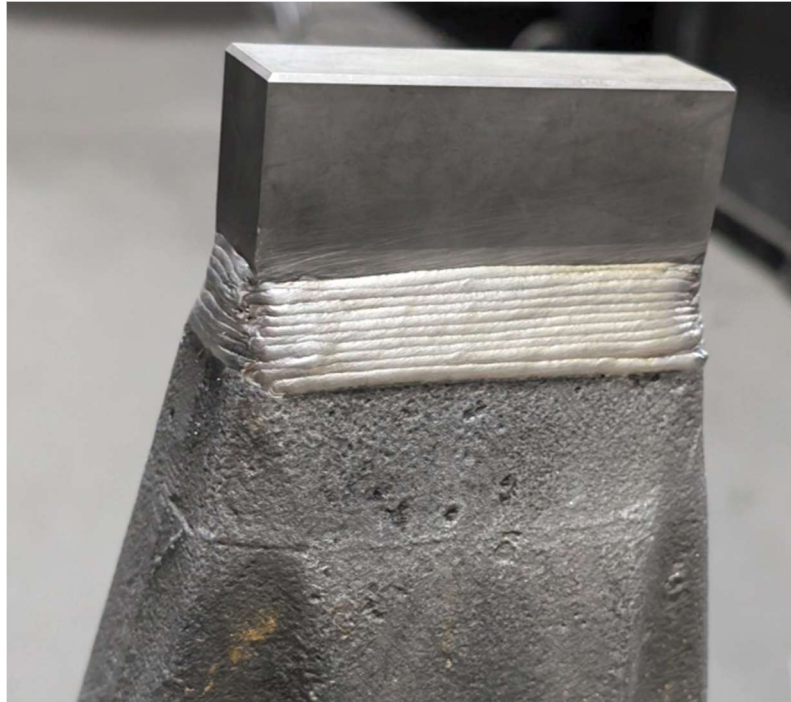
Dissimilar metal weld completed using HLBW with Tungsten carbide (Top) welded to a wear casting for a mining application [courtesy of Apollo Machine, Canada].
